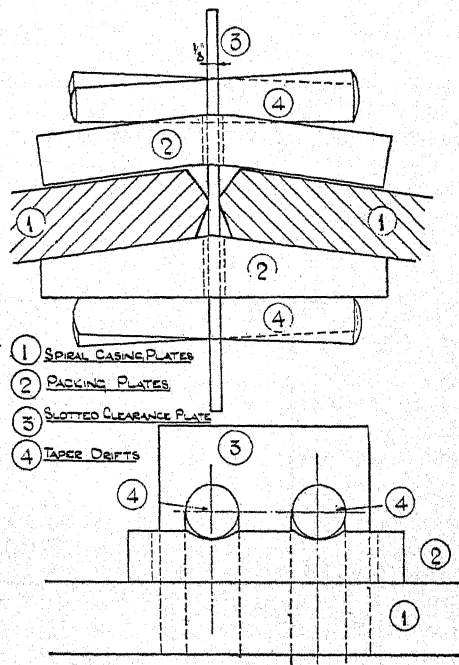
Application of butt closer for welding spiral casing.
